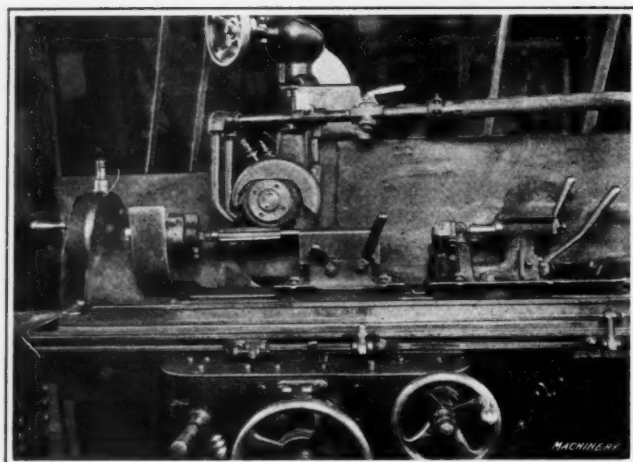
Set-up on a No. 20 Bath Multiple-key Shaft Grinding Machine for grinding a Splined Transmission Shaft
